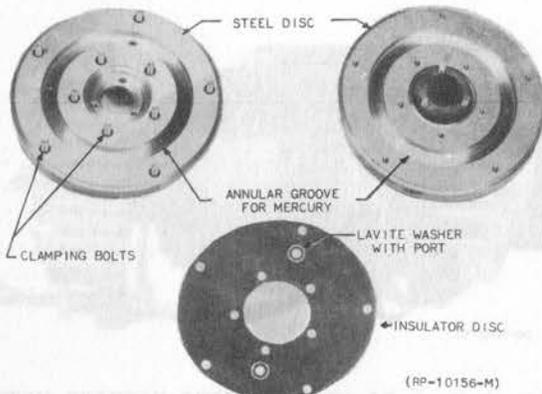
ASSEMBLY OF A ROTARY MERCURY-TYPE INT. UNIT
